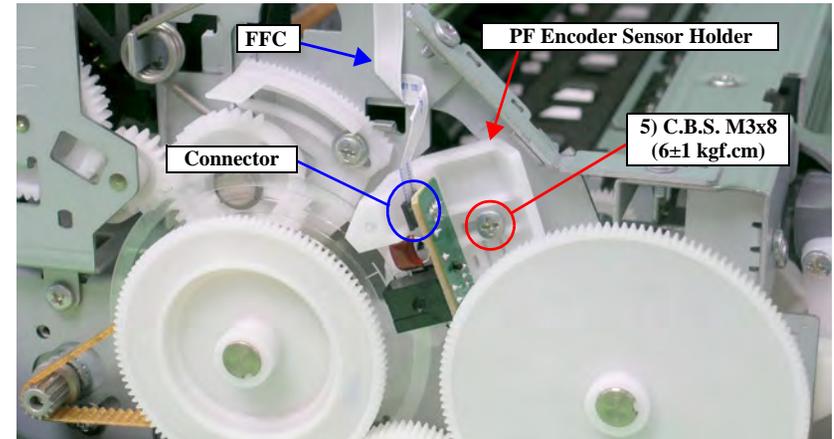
Removing the FFC and the Screw that Secures the PF Encoder Sensor Holder
